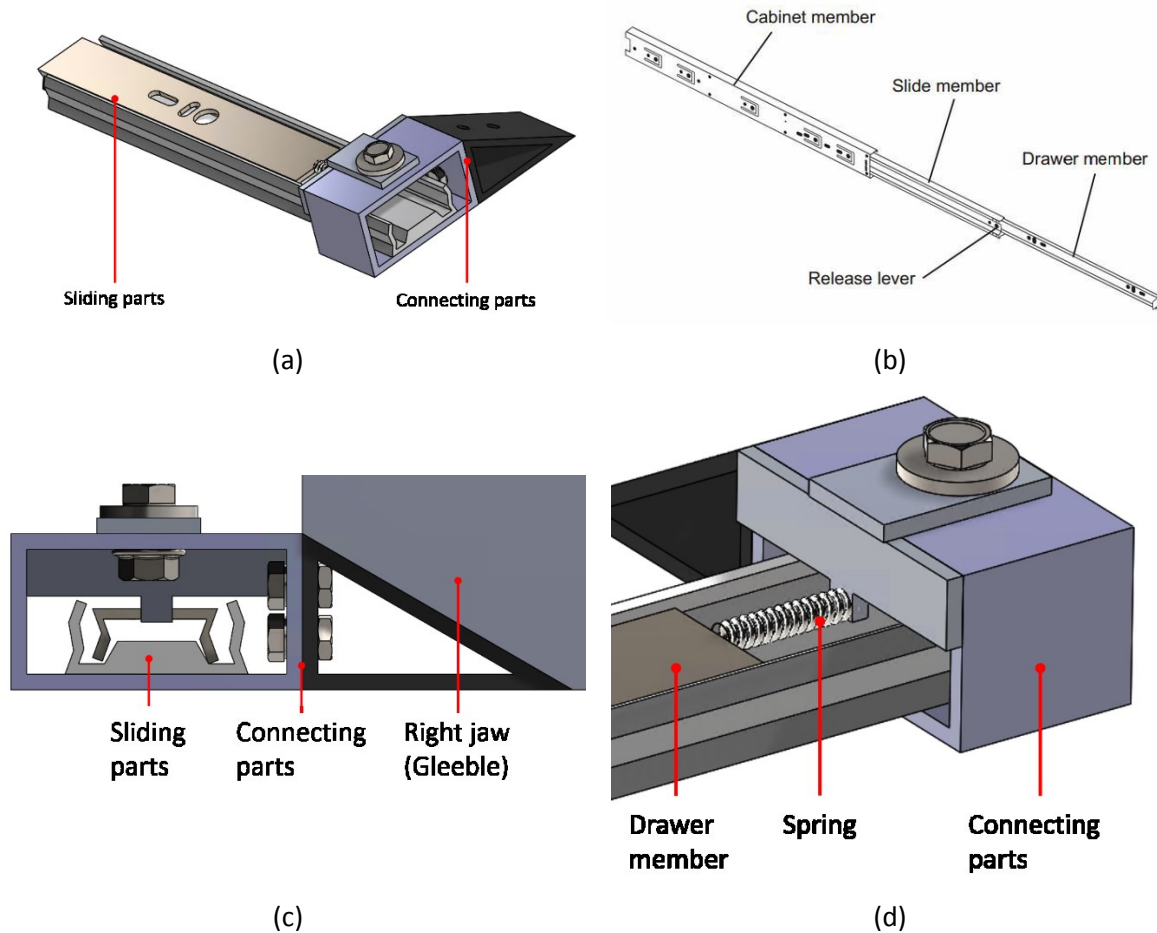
Slider: (a) full; (b) sliding parts; (c) connecting parts connected to Gleeble; (d) spring between drawer member and connecting parts.
